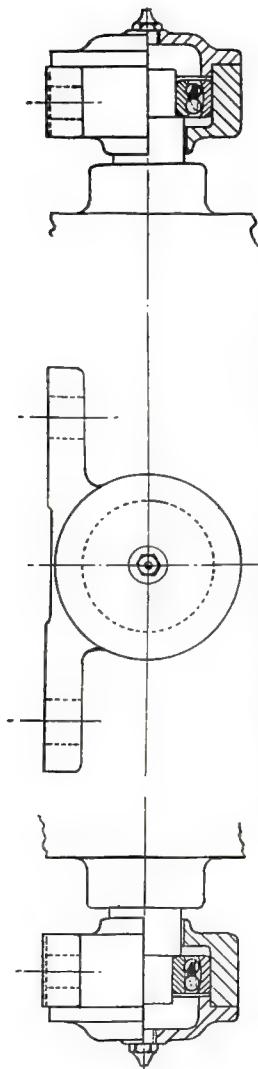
Self-Aligning Ball Bearings to Conveyor Roller.
